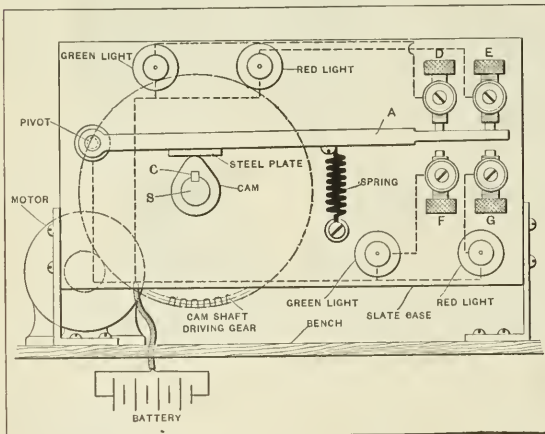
Electrical Device for inspecting Gas Engine Cams of Detachable Type
